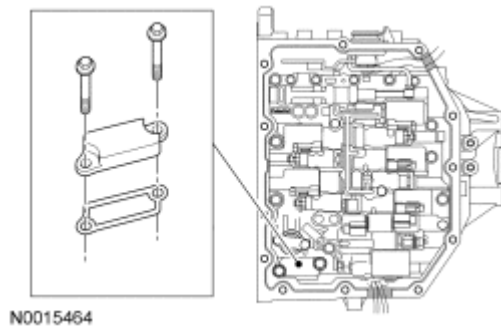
Identifying Suction Cover, Gasket & Bolts
